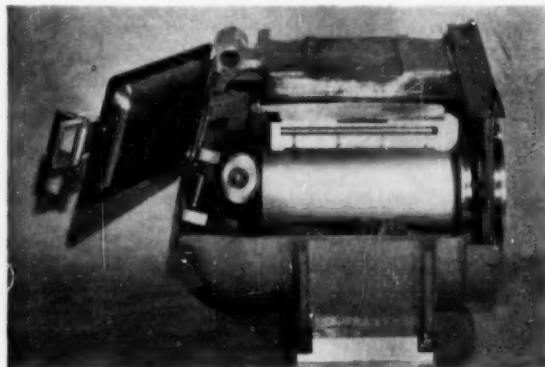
SOLID-TYPE-BEARING JOURNAL-BOX ASSEMBLY
